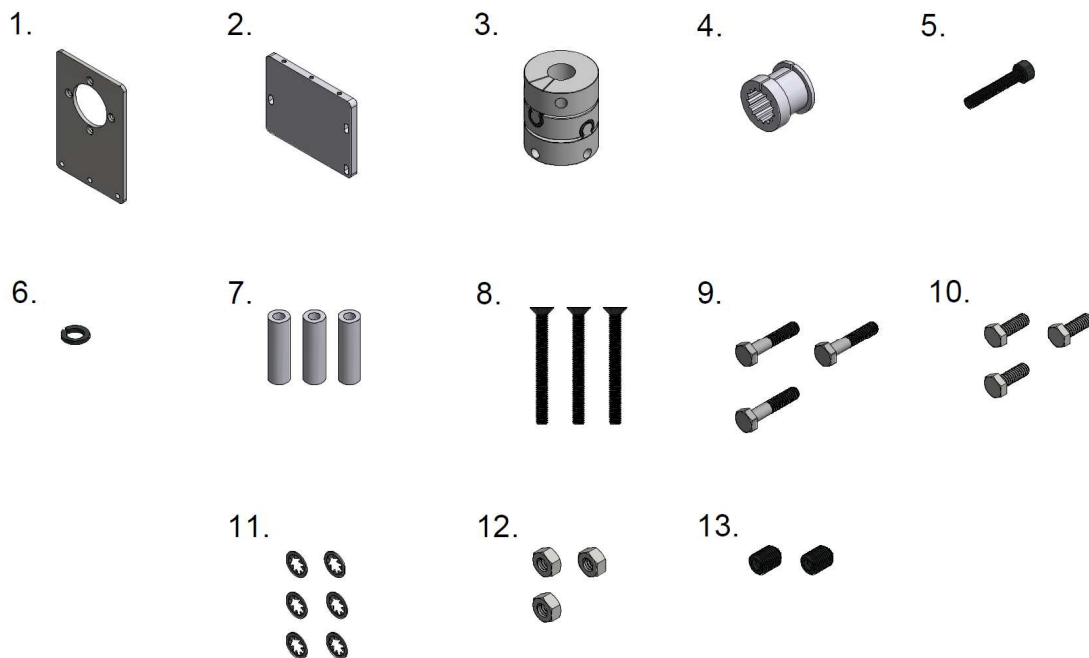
Pieces Supplied with the AGA94.3 Bracket Kit
